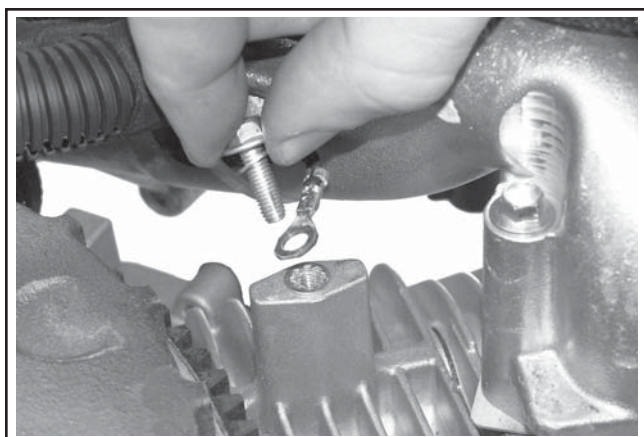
Installing Intake Manifold with Wiring Harness.
